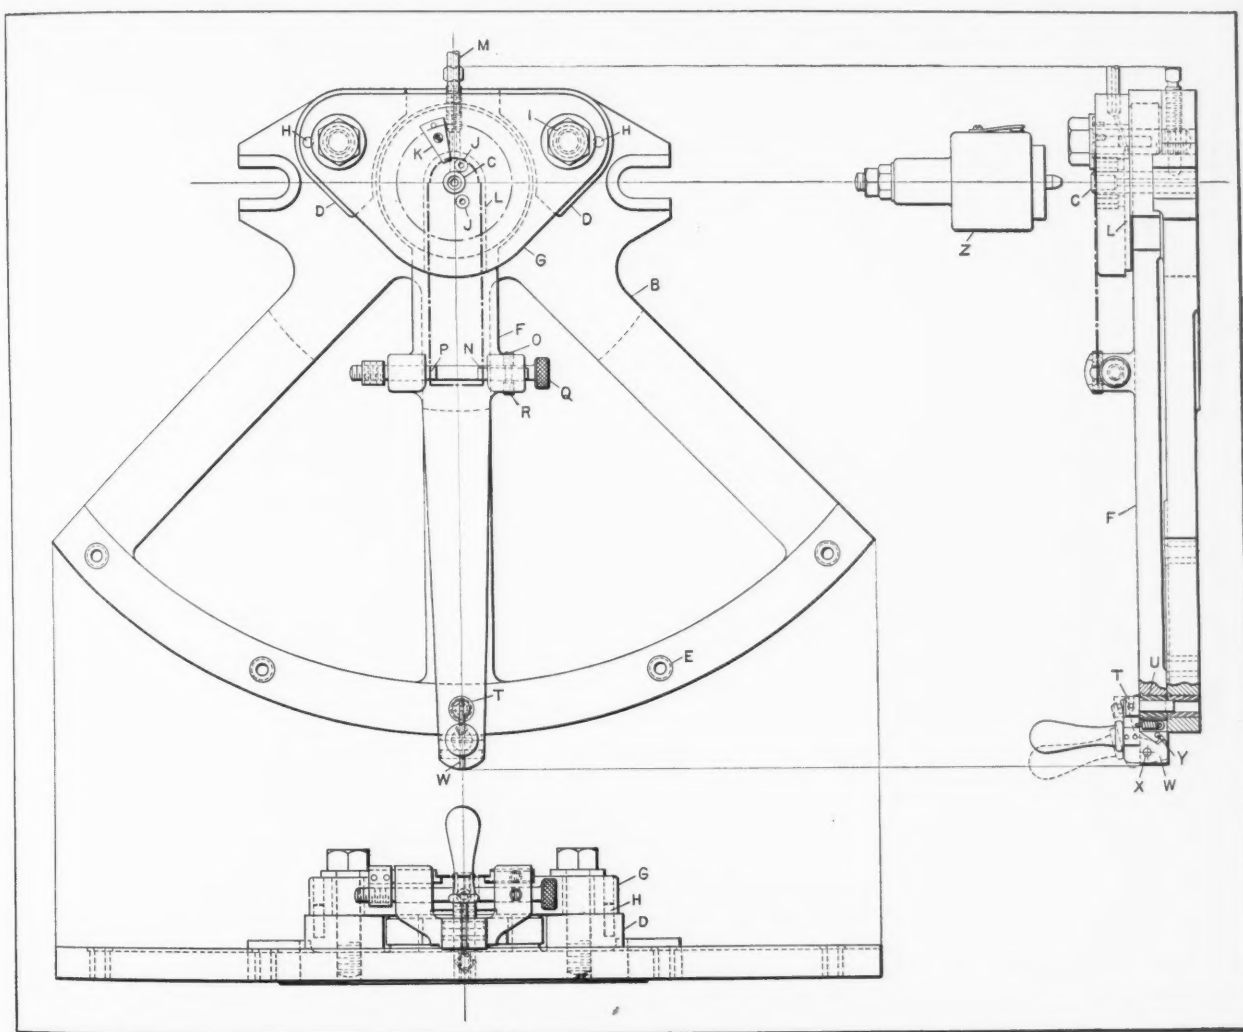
Die Member Used with Punch Shown in Fig. 1
